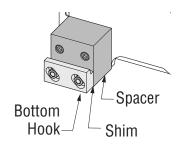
Remove the bottom bolt-on hooks, leave the spacers and shims, if applicable
